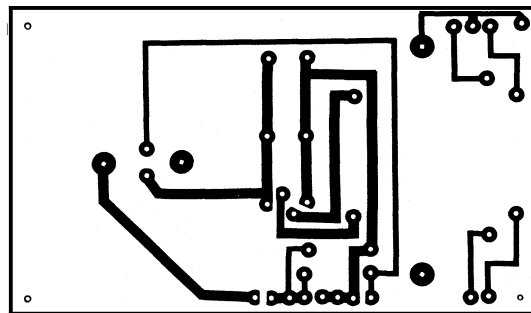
Full-size printed-circuit layout; component placement is shown in fig. 3.
